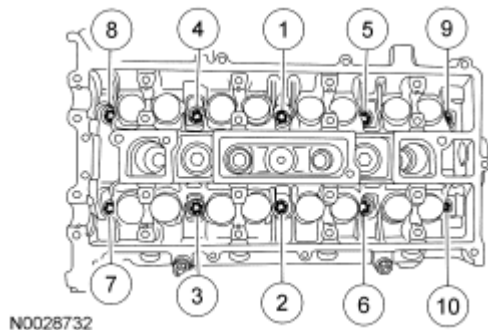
Identifying Tightening Sequence Of Cylinder Head Bolts
